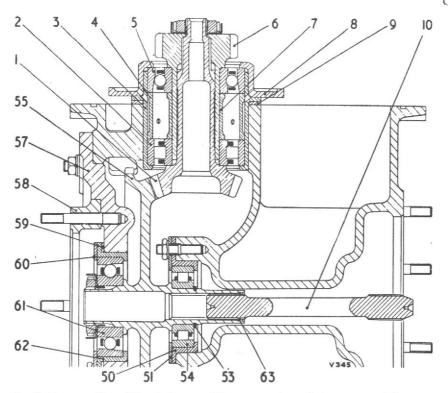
Scrap section of the fuel pump drive gear and vertical accessory drive gear
